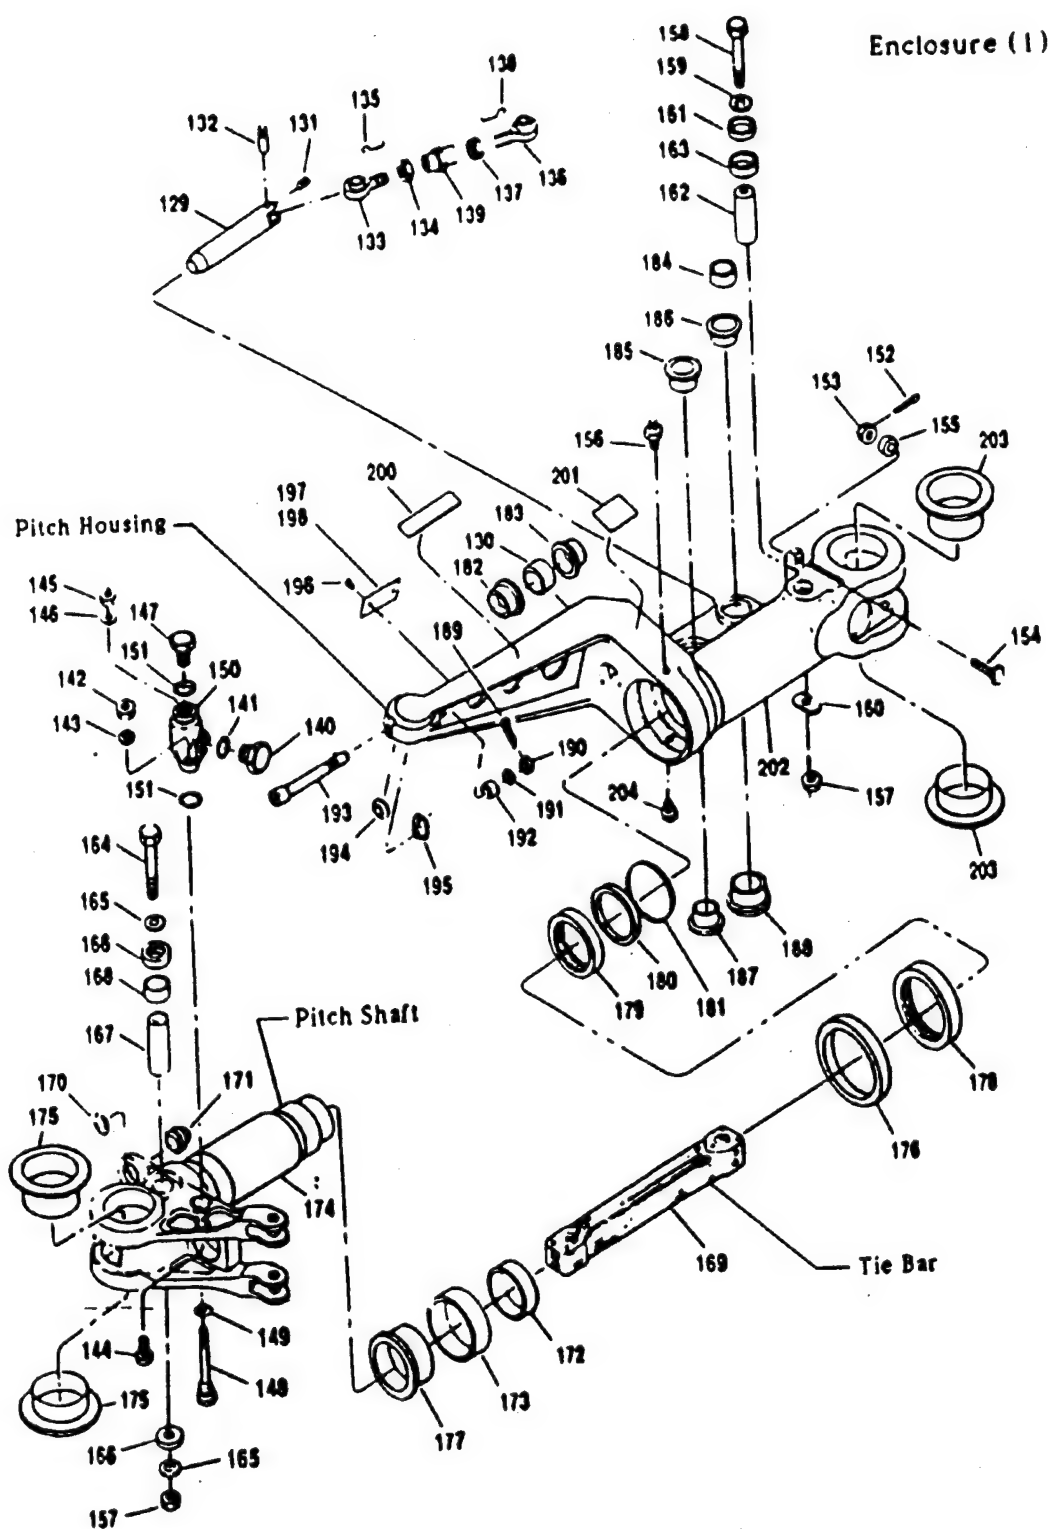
CH-46 Rotary Wing Head Pitch Change Assembly, Exploded View
